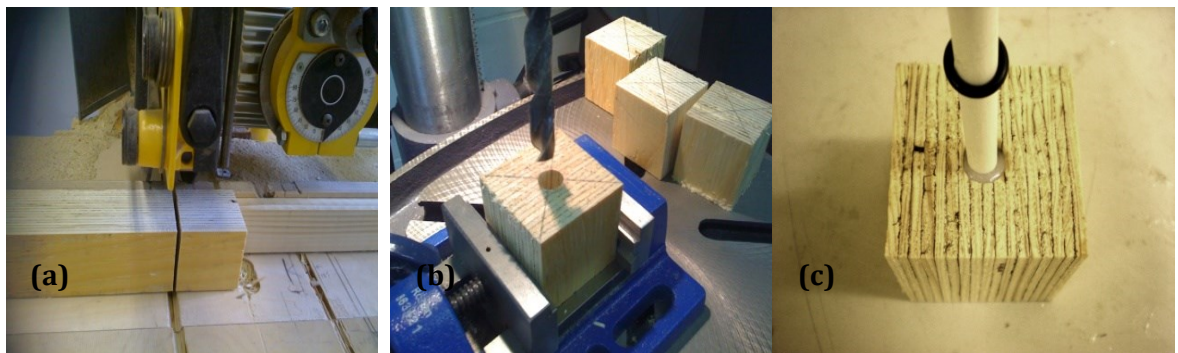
Overview of sample fabrication (a) wood block cutting (b) centre hole drilling (c) rod insertion into adhesive-filled hole.
